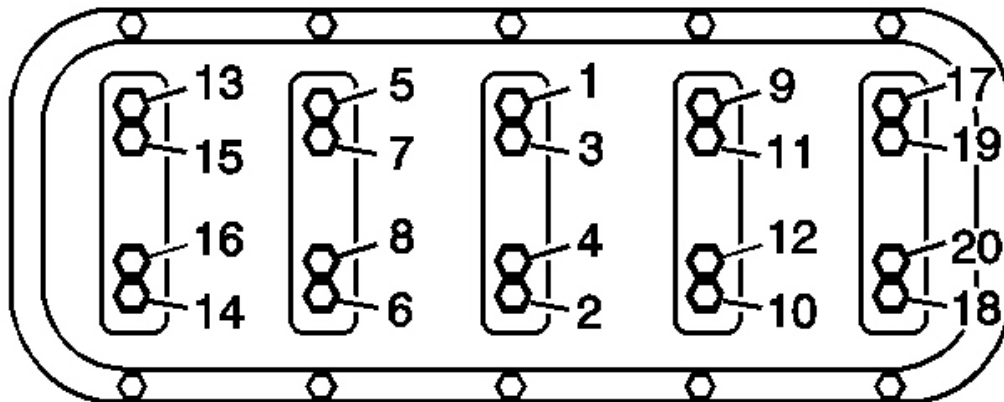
View Of Crankshaft Bearing Bolt Tightening Sequence
